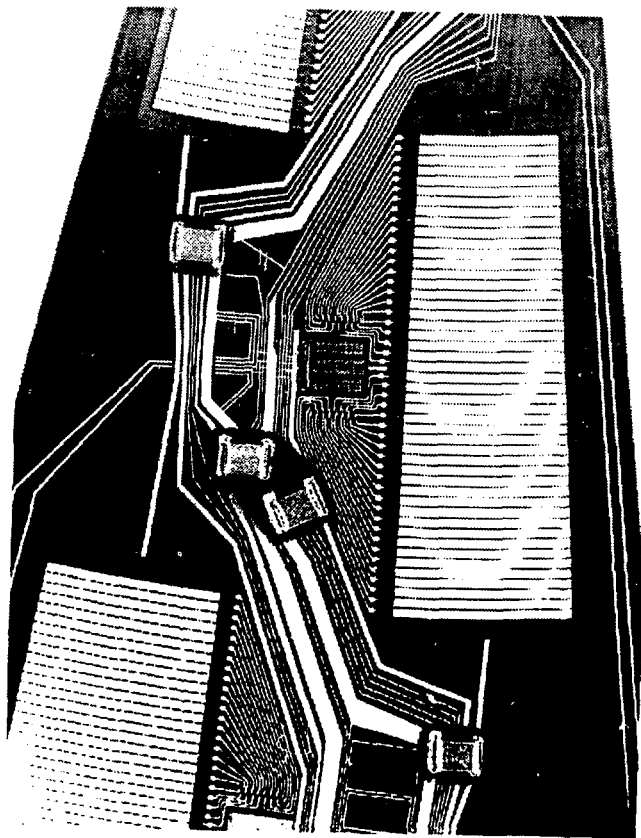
A view of part of a fan-shaped Kevlar printed circuit board, showing the layout of Balder readout chips and silicon strip detectors.
